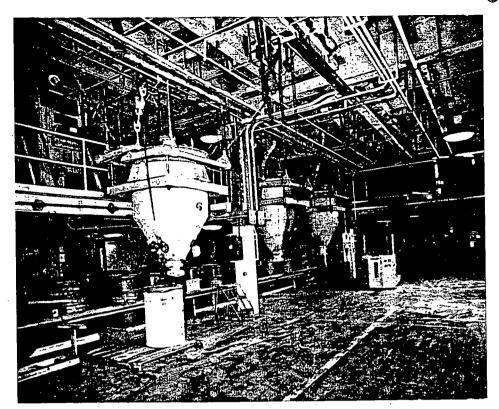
East Weigh Bins on First Floor (ELEV. 580' - 0")
